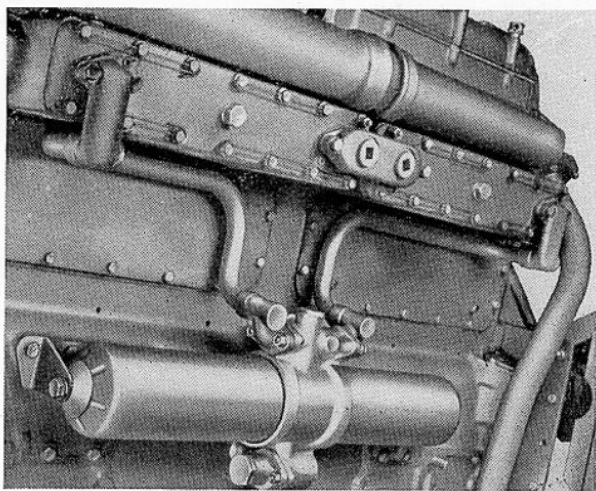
PUROLATOR OIL FILTER SHOWING CONNECTIONS TO OIL COOLER
